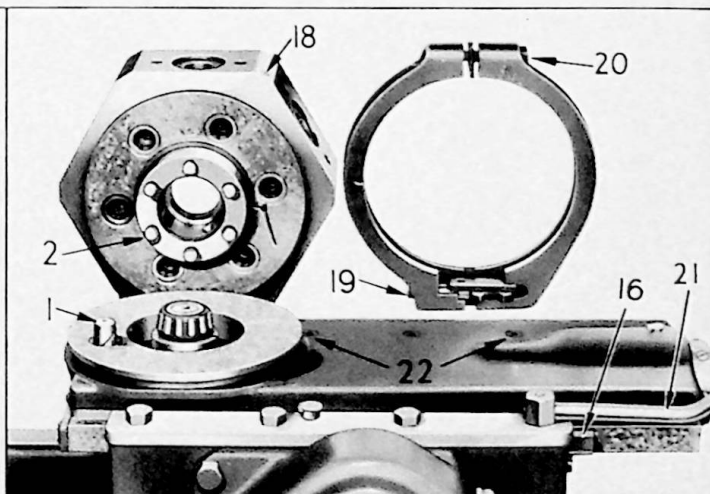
Turret Seat and Circumference Binder Ring, No. 2 Turret Lathes.
